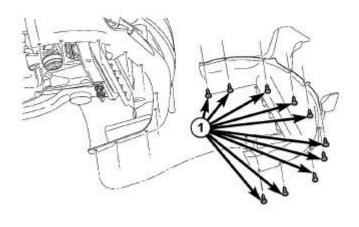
CLOSEOUT- FRONT LOWER FASCIA Courtesy of CHRYSLER LLC
